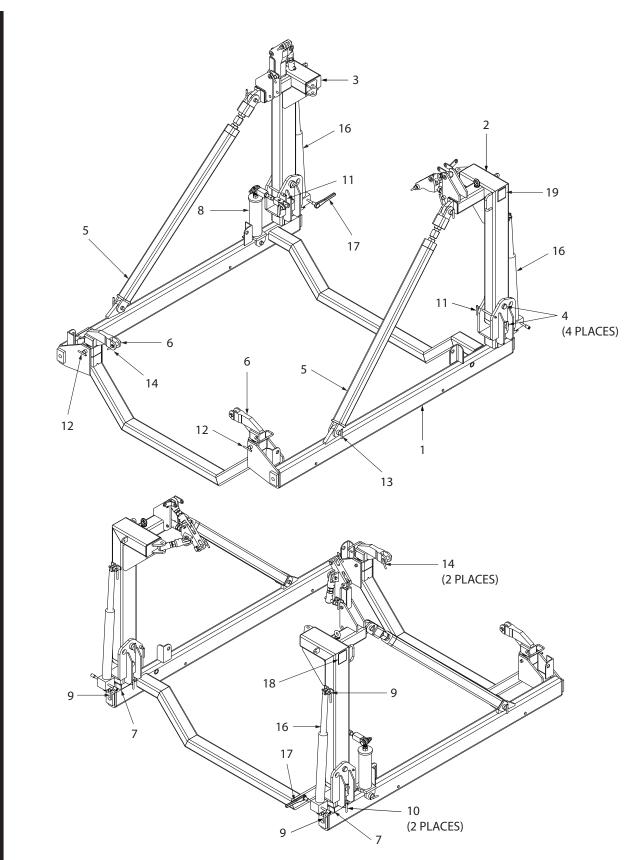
AGSE-E23704-S01 Cradle Assembly
